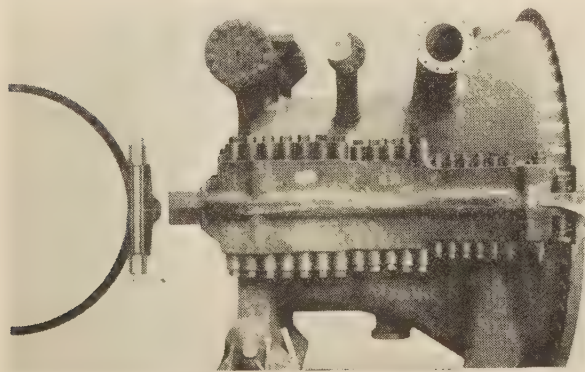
TYPICAL HORIZONTAL JOINT FLANGE AND BOLTING
